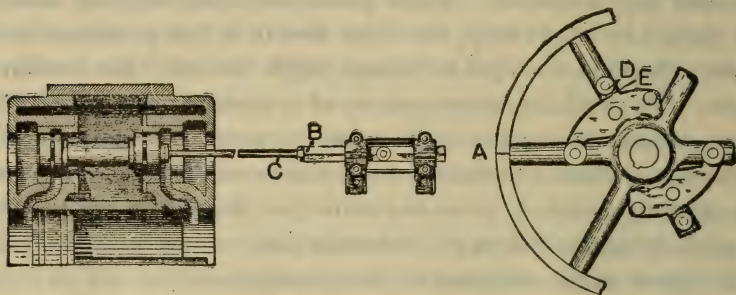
Valve gear of the Armington & Sims automatic engine.
